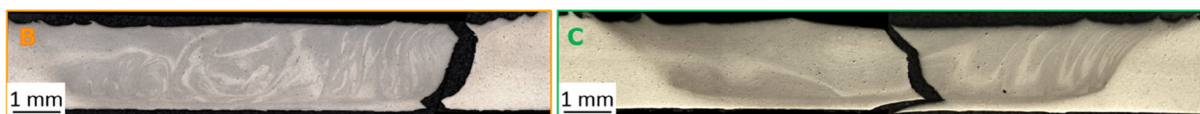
Cross-sections of samples B and C after tensile testing; etched using Keller etchant.
